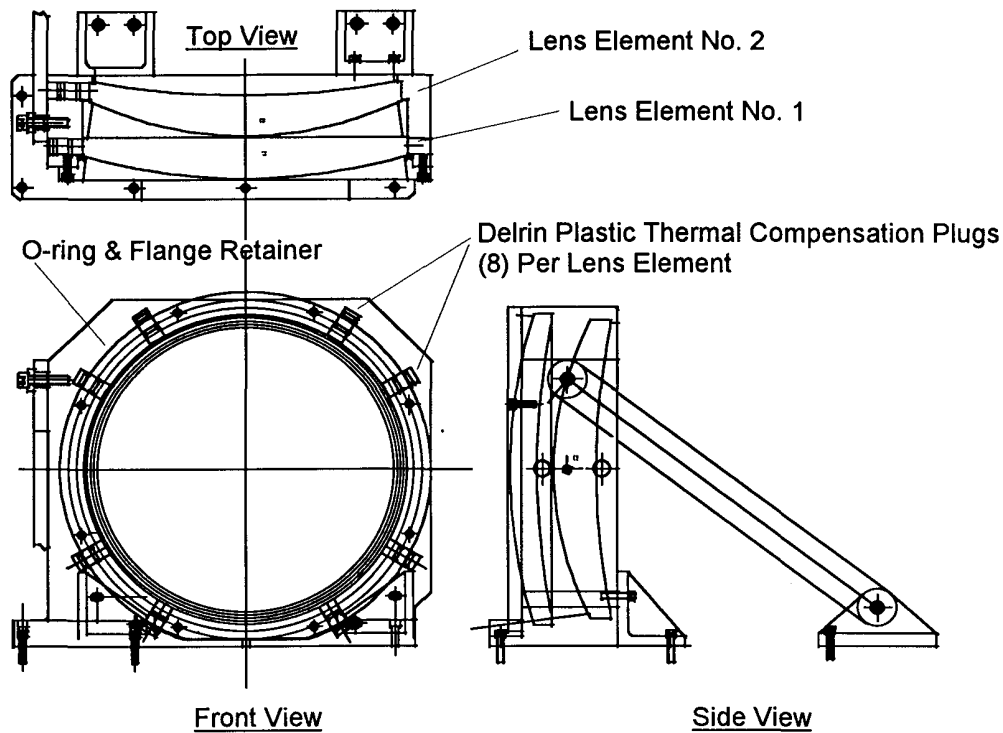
Mechanical Design of the 12.50" Diameter, 2-Element Lens Cell
